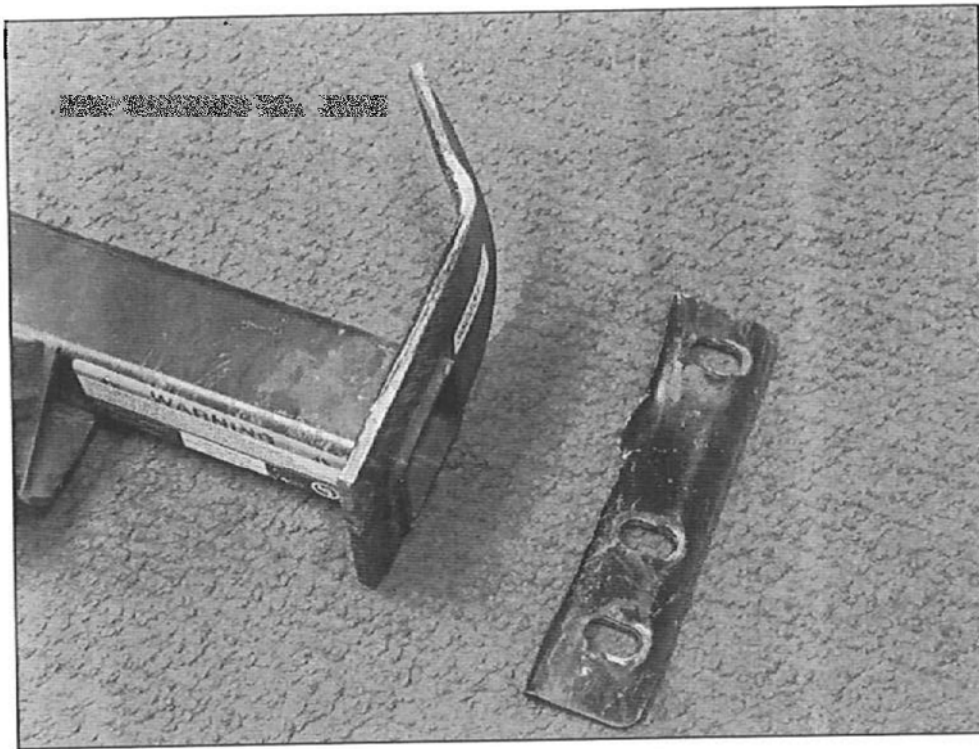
Right Side – breakage followed the radius to the mounting – the fractured end plate bent inward, apparently because the hitch had been pushed forward
